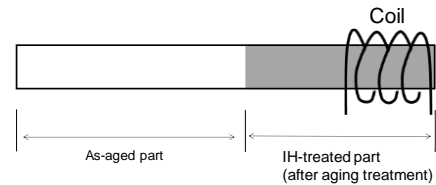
Schematic drawing of partially IH-treated rod after aging treatment [17].
